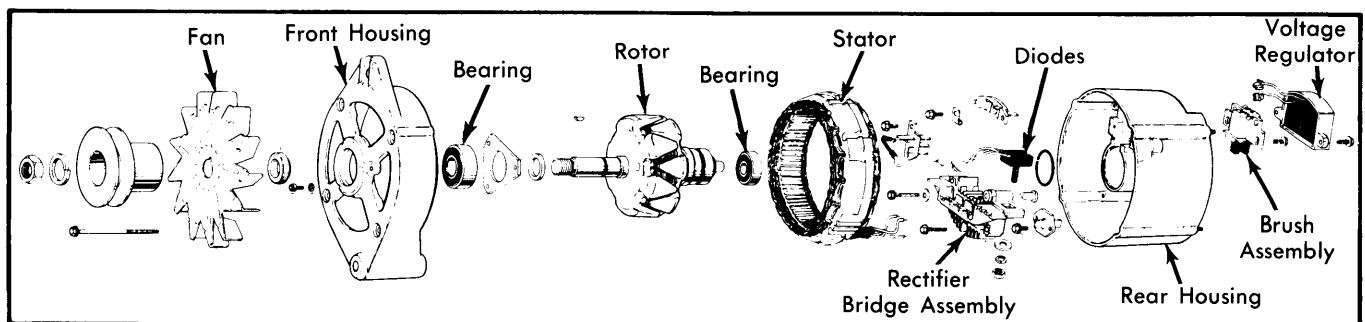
Disassembled View of SEV Motorola Alternator (Volkswagen Shown)
